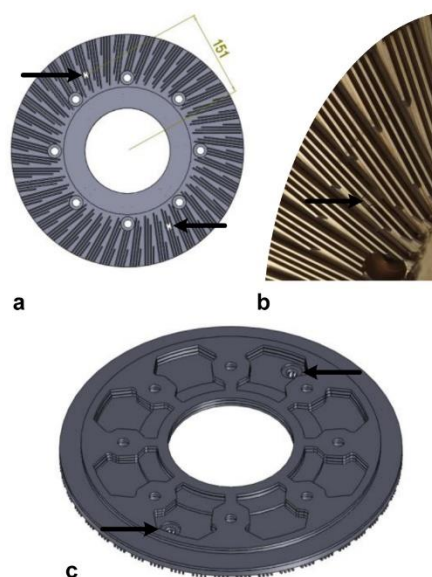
a) The location of the sensors in the stator plate (front view) b) Close up of the stator plate with sensor c) The location of the sensors in the stator plate (back view)
